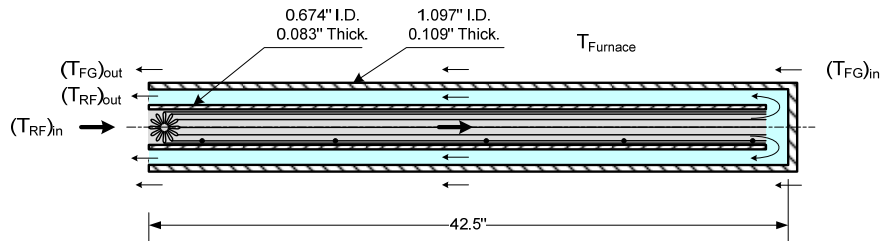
Tube Exchange Tube with Metal Mesh inside Inner Tube
